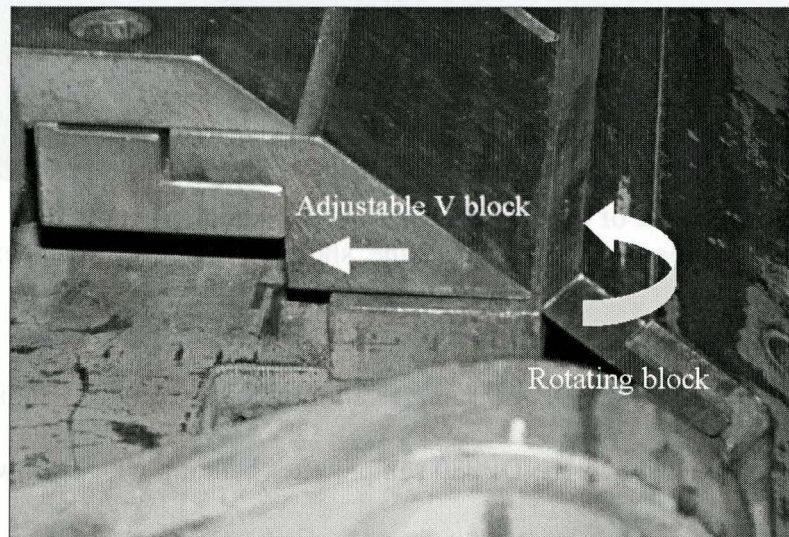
Commercial (manual) bending machine used to bend DP780 samples around a 1 mm radius, and an inclination of 40°.
